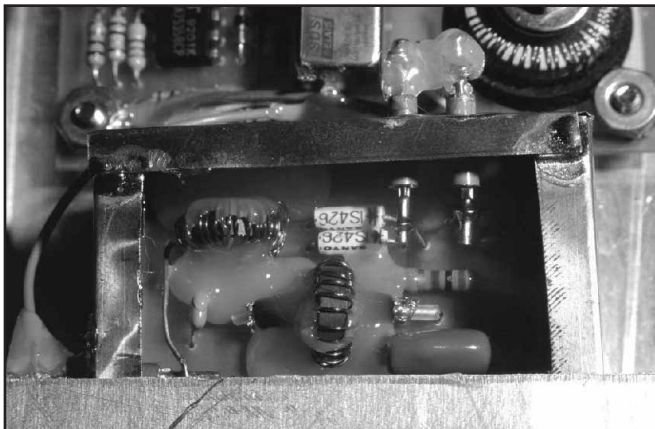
After testing and before closing the controller, liberal amounts of hot-melt glue were used to immobilize anything that could otherwise shake and become loose.
